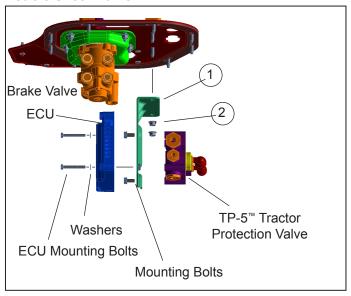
(Type C) Bracket with ECU and TP-5 Tractor Protection Valve
